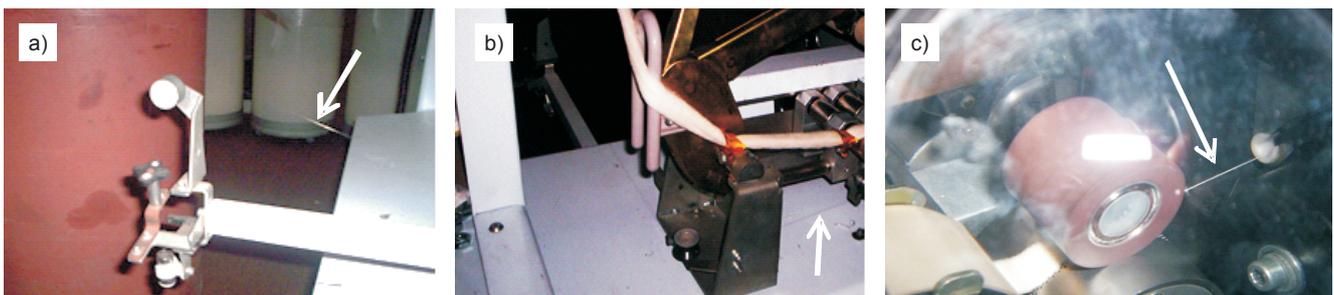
a) Wire being placed on a special guide from the back of the machine, b) wire being placed on the first drafting unit using a guide roller and c) wire being placed together with the core sliver on the front roller of the first drafting unit.
